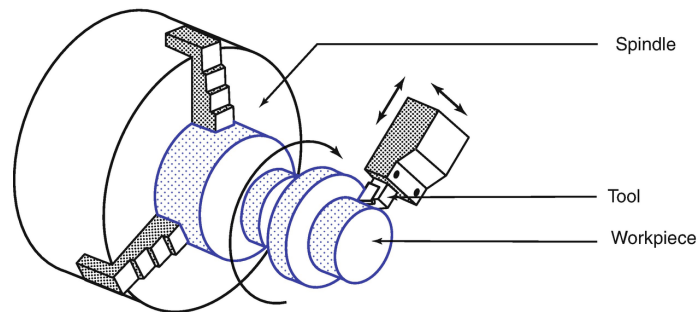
Lathe concept. The material is hold into a spindle and the cutting tool moves without spinning ⁴¹
